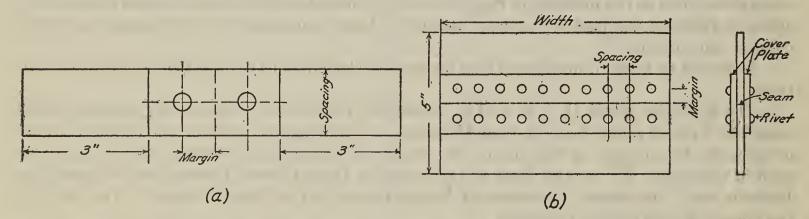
(a) Test specimen for single-rivet tests. (b) Test specimen for multiple-rivet tests.
